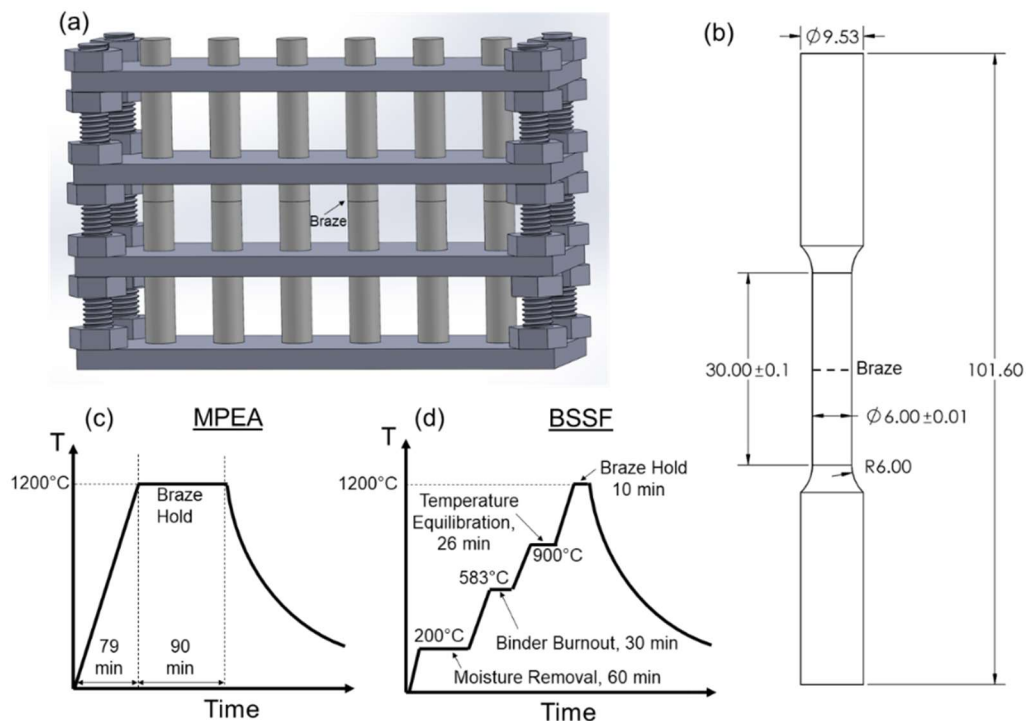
(a) Schematic illustration of the fixturing assembly employed during brazing. (b) Drawing of the ASTM E8M specimen machined from each butt joint, where the dimensions are in mm. (c-d) Thermal profiles employed for brazing with (c) the MPEA filler [2] and (d) the BSSF filler [61].
